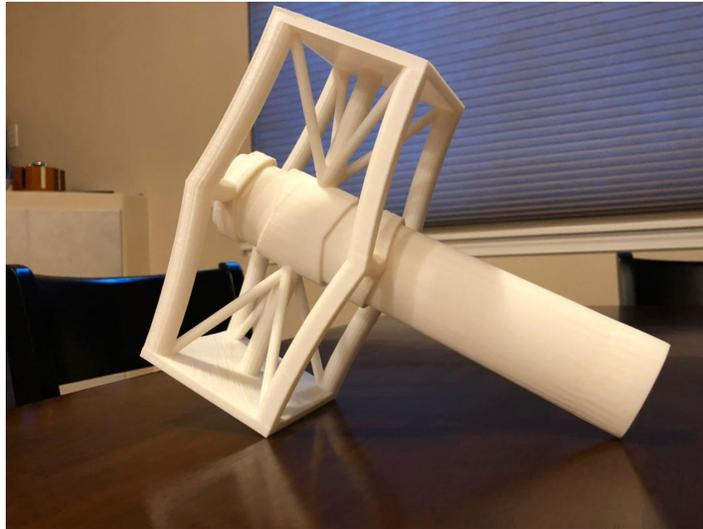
represents the primary design that was chosen with rough dimensions of what the team wanted the hammer to look like. Knowing that the hammer was going to be cast out of steel the team recognized that the whole hammer could not be solid. However, the team also wanted to use the side faces of the hammer to include artistic depictions of Thor and include images relating to some of Thor's stories. A compromise was concluded by developing a hollow hammer with internal supports and using a faceplate design that could be cast separately and then attached to hide the internals. Using AutoDesk Inventor, a CAD model was constructed showing the internal design of the hammer.
